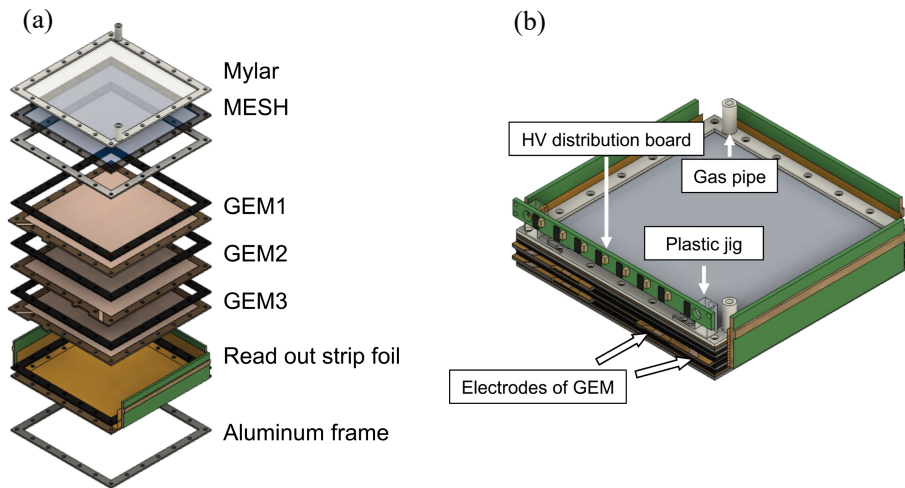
Schematic view of the parts and assembled shape of a GTR chamber, taken from Ref. [41].
